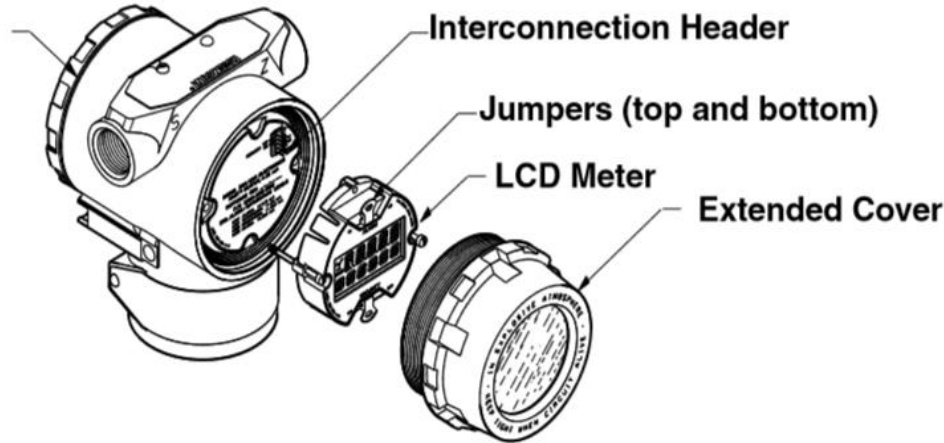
Exploded View of the Transmitter and LCD Meter.
